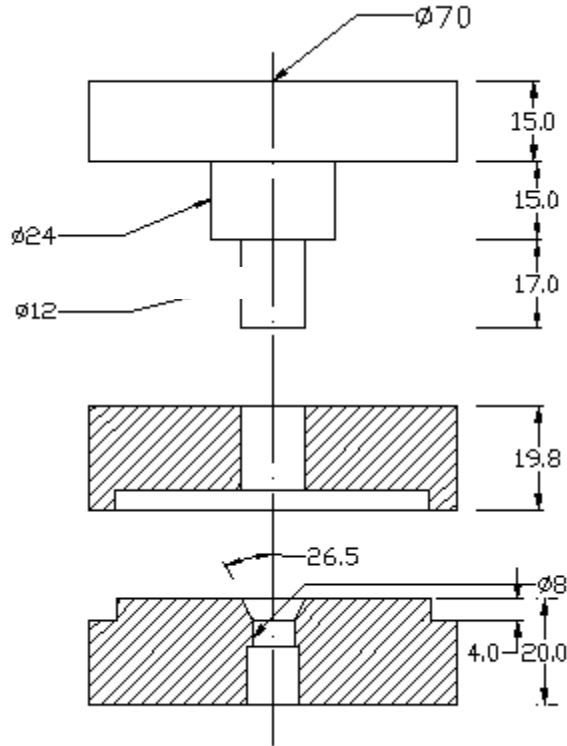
TWO-DIMENSIONAL view of the 12:8 die
